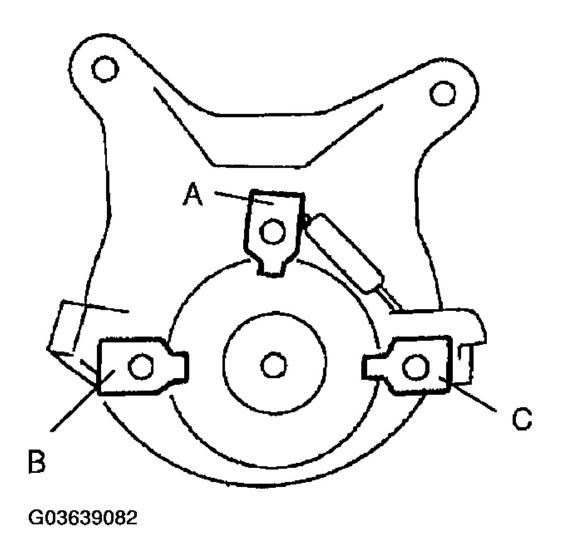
Identifying Oil Pressure Gauge Terminals Courtesy of MAZDA MOTORS CORP.
